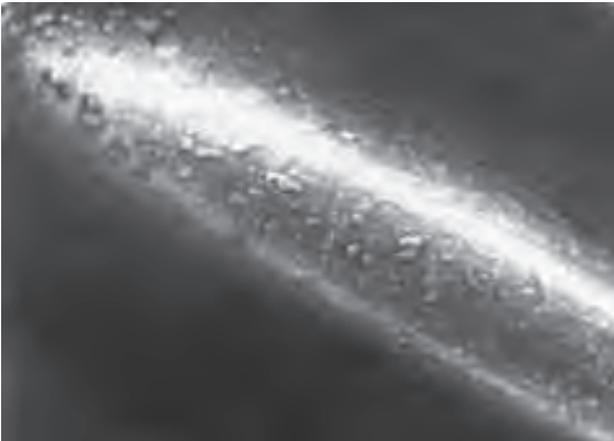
Electric Corrosion on Outer Ring Surface of Deep Groove Ball Bearing
